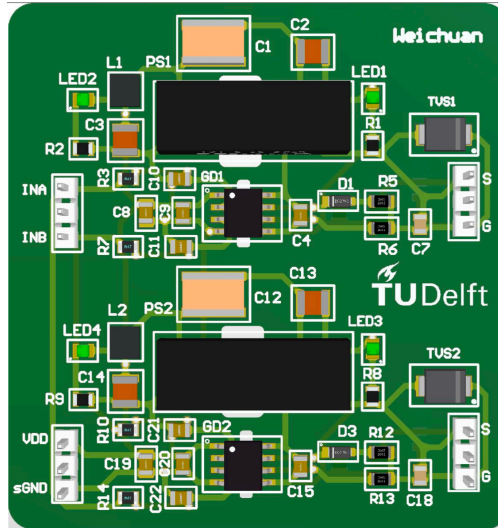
PCB board of the gate driver for half H-bridge designed in Altium Designer
